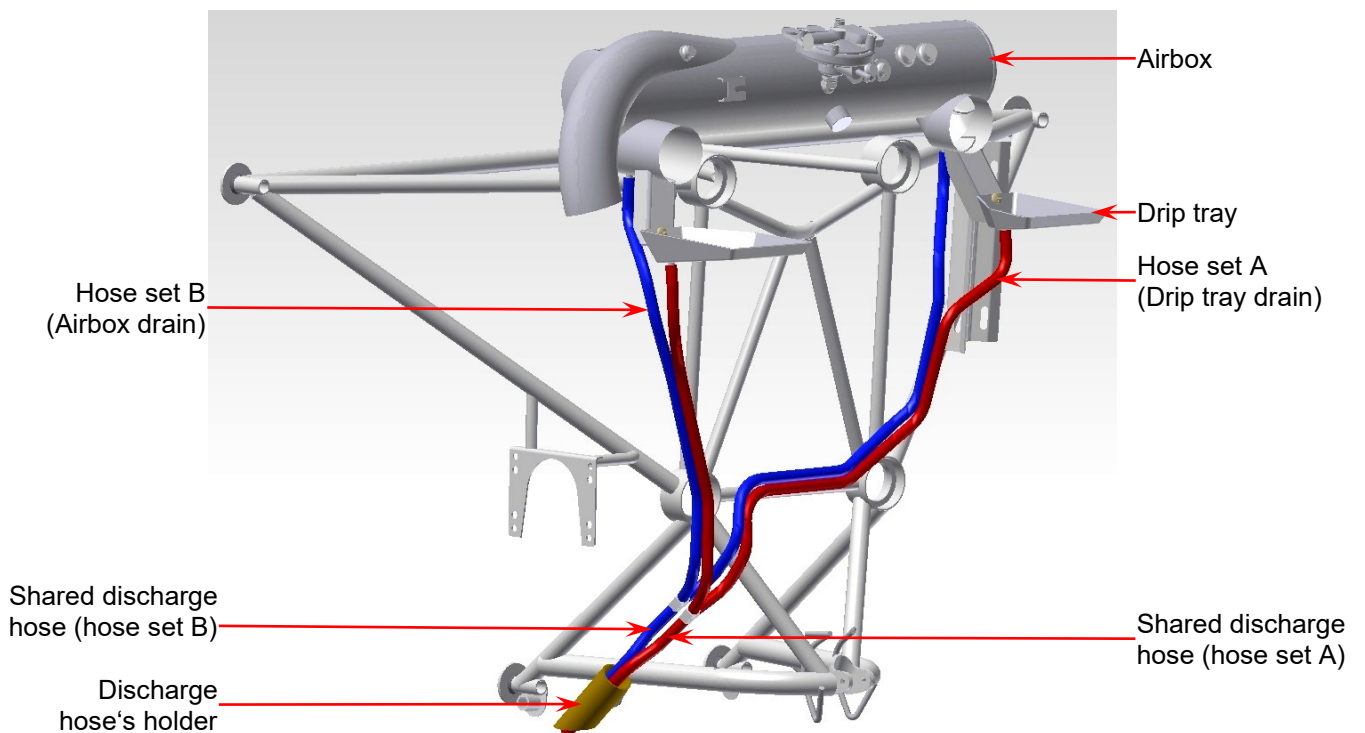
Connecting of drain hoses – Rotax 914, retractable landing gear (front view)
